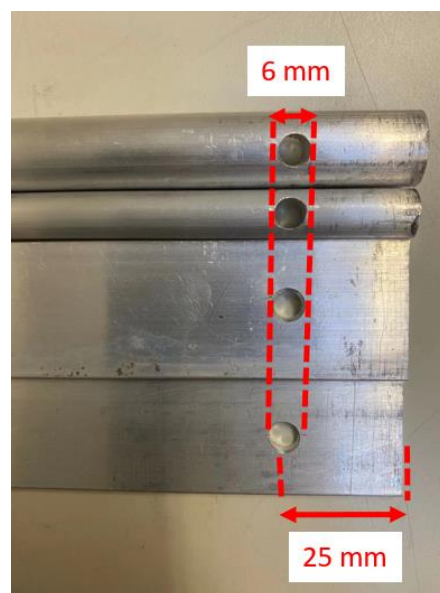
M6 holes threaded at the end of rods/busbars.
